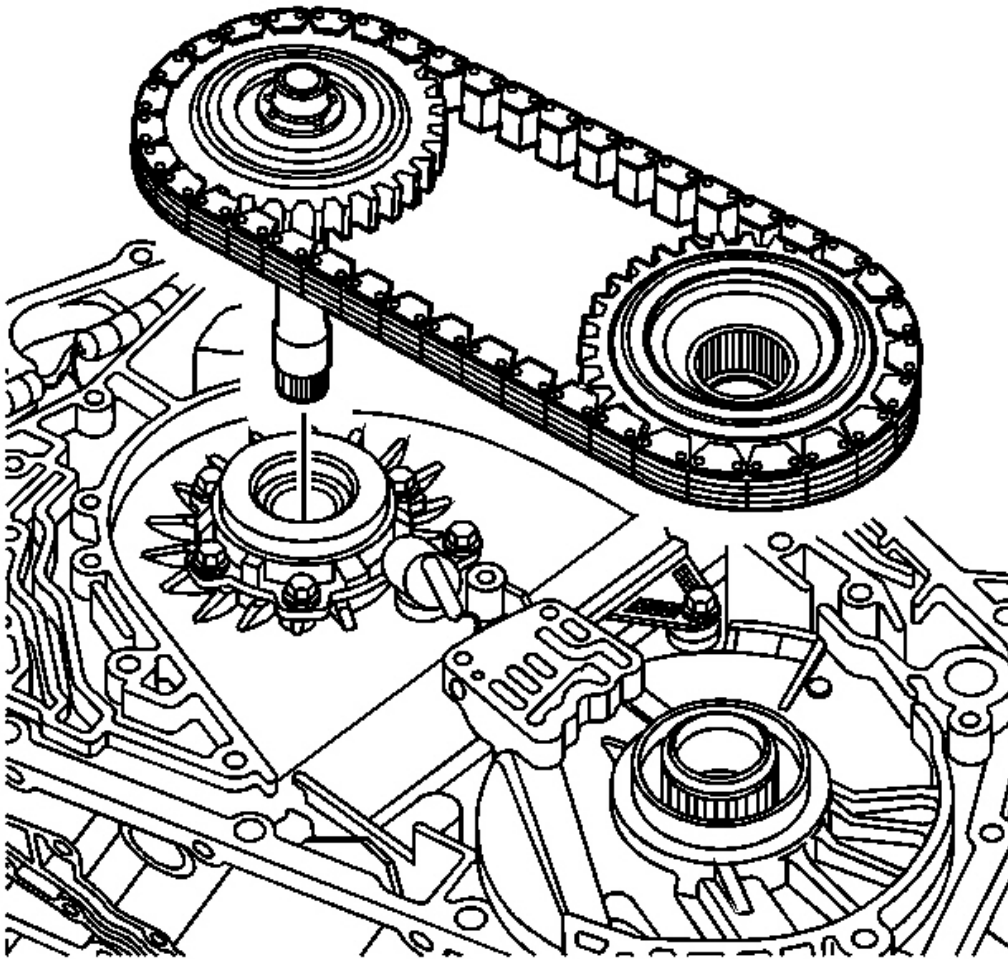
View Of Drive Chain To The Drive And Driven Sprockets
